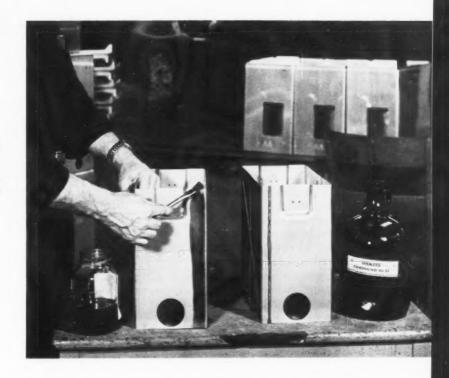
Aluminum parts are dipped in a hot solution of an alkaline cleaner, prior to deoxidizing for spot-welding.
